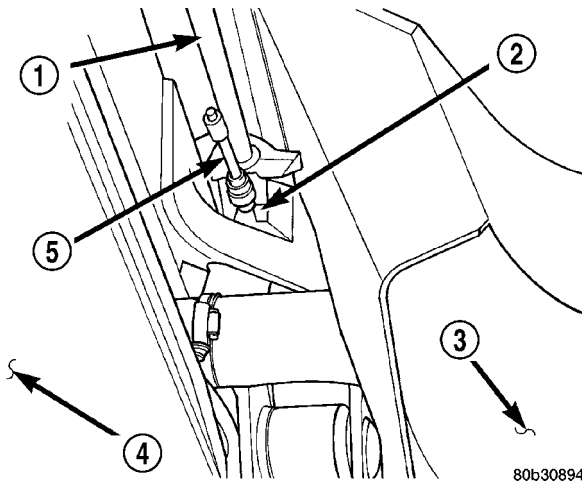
REAR PARKING BRAKE AND RETAINER CLIP (LEFT)
